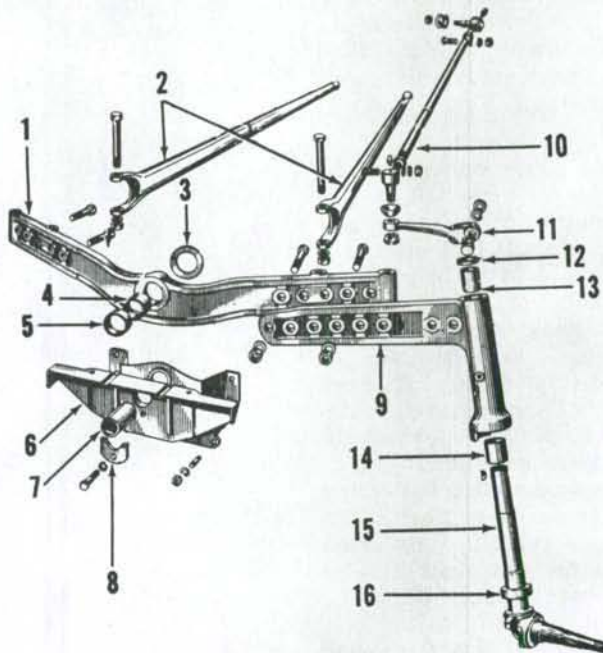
Exploded view of front axle and related parts used on the Fordson Dexta. Similarity to American produced Ford tractors will be noted.
